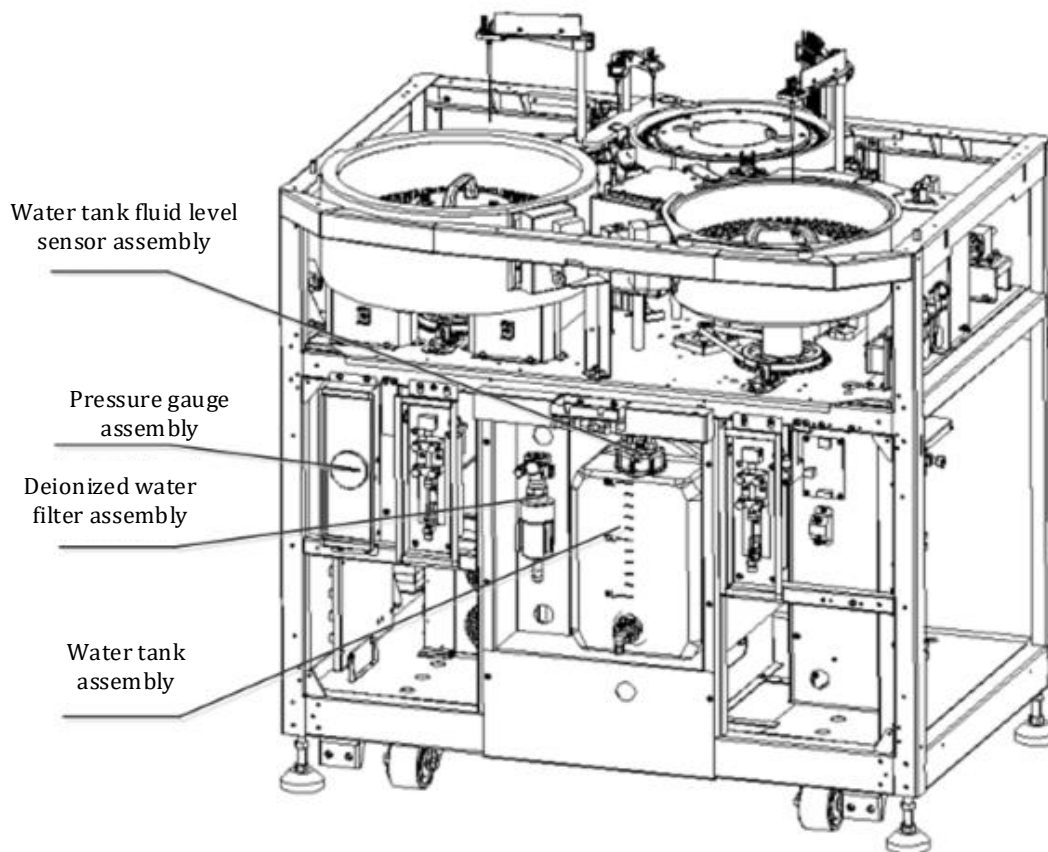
Assembly drawing of whole unit -- Water supply/drainage module-front view
